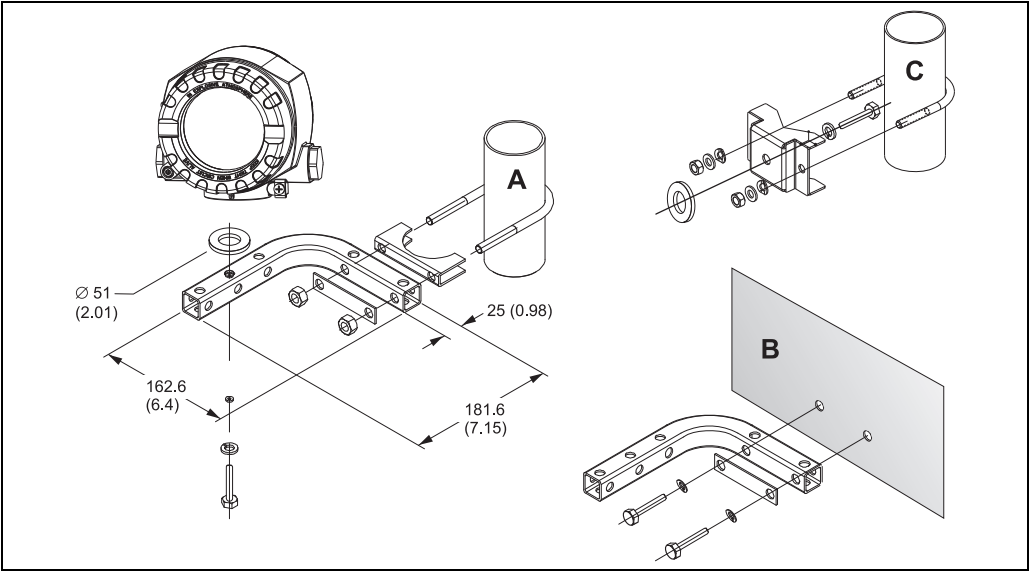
Installation of the field transmitter using the mounting kit, see chapter 'Accessories'. Dimensions in mm (inch)
